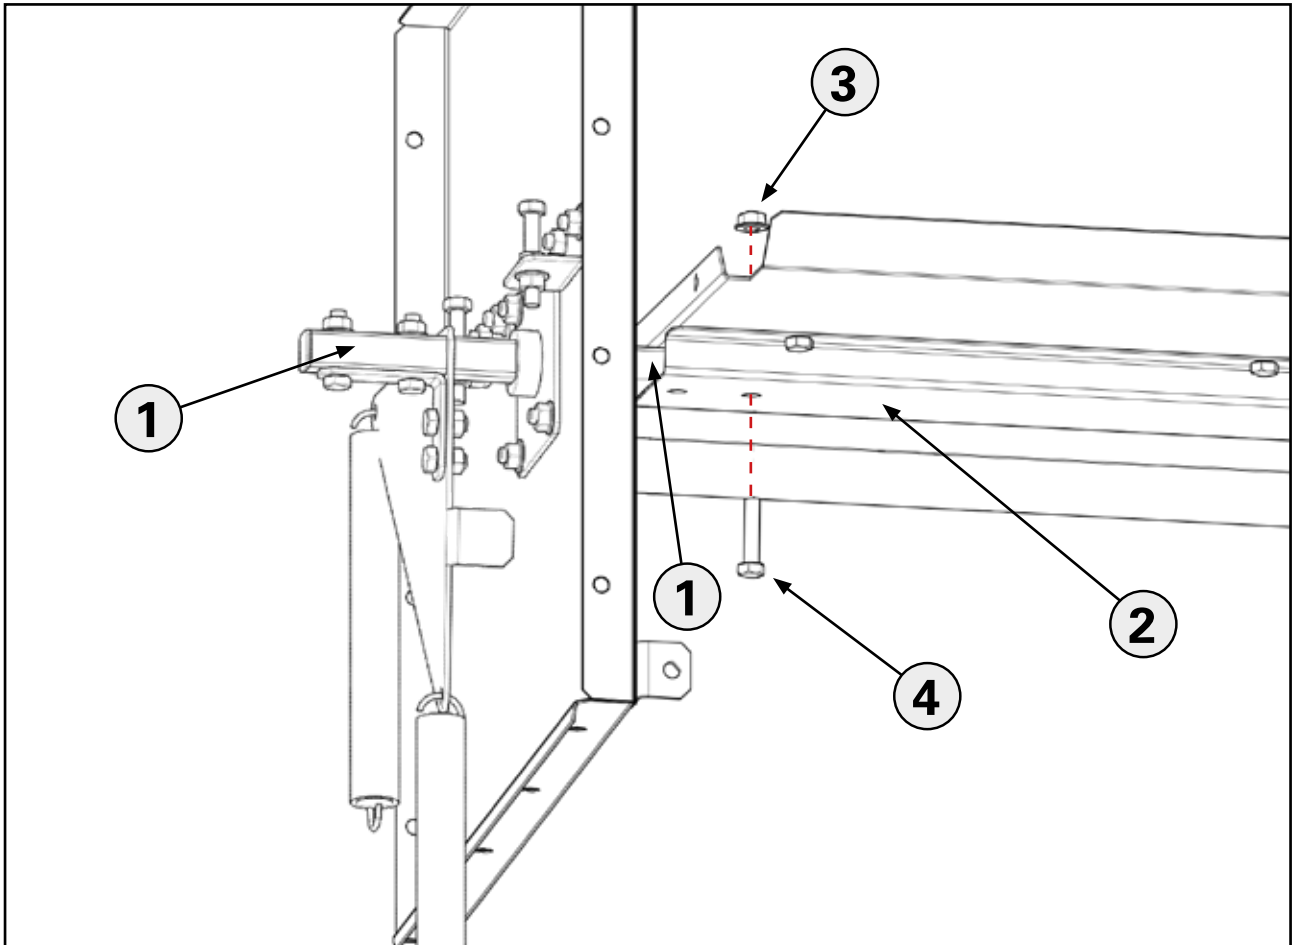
Attaching the half batch air flow panel to the half batch side panel
